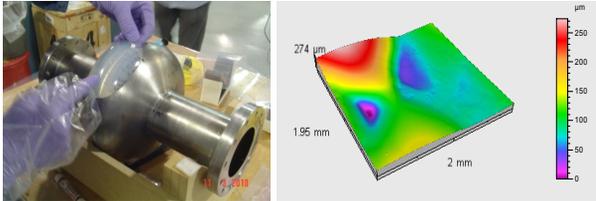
a) Cavity moulding and b) Profilometry plot of weld bead.
